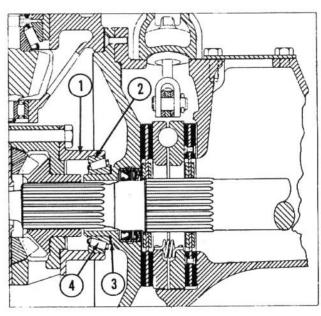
Differential Assembly — Partial Section — Non-Diff. Lock
